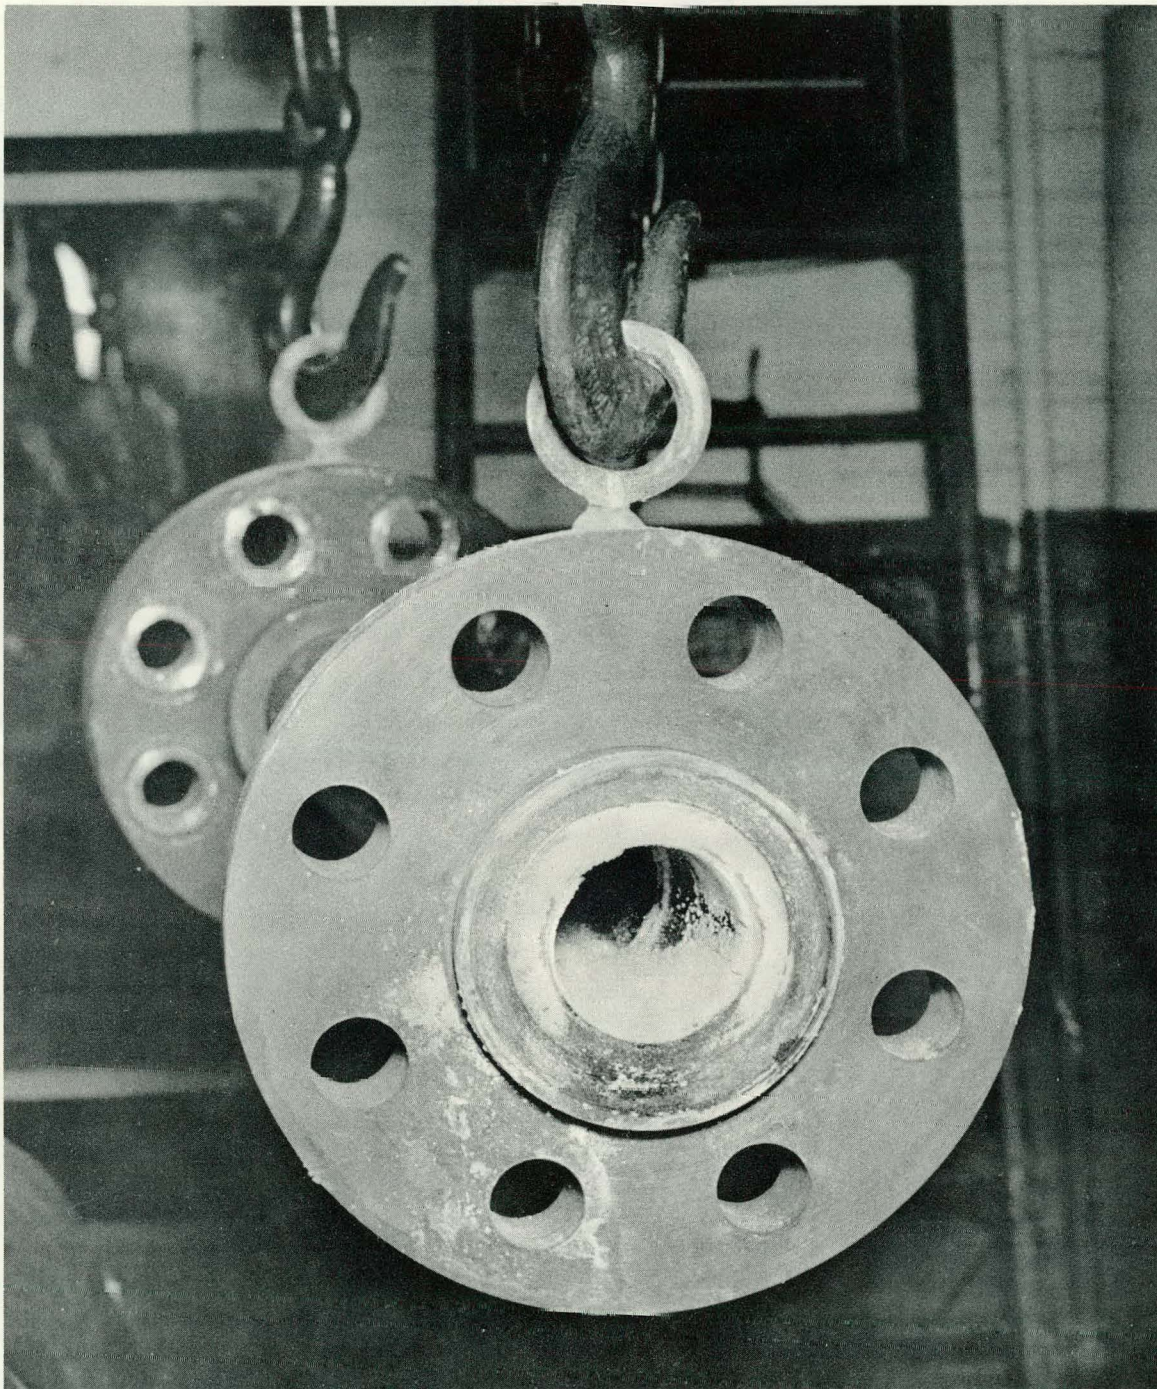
Downstream Test Section Flange Deposit (Test MEDB-1)
